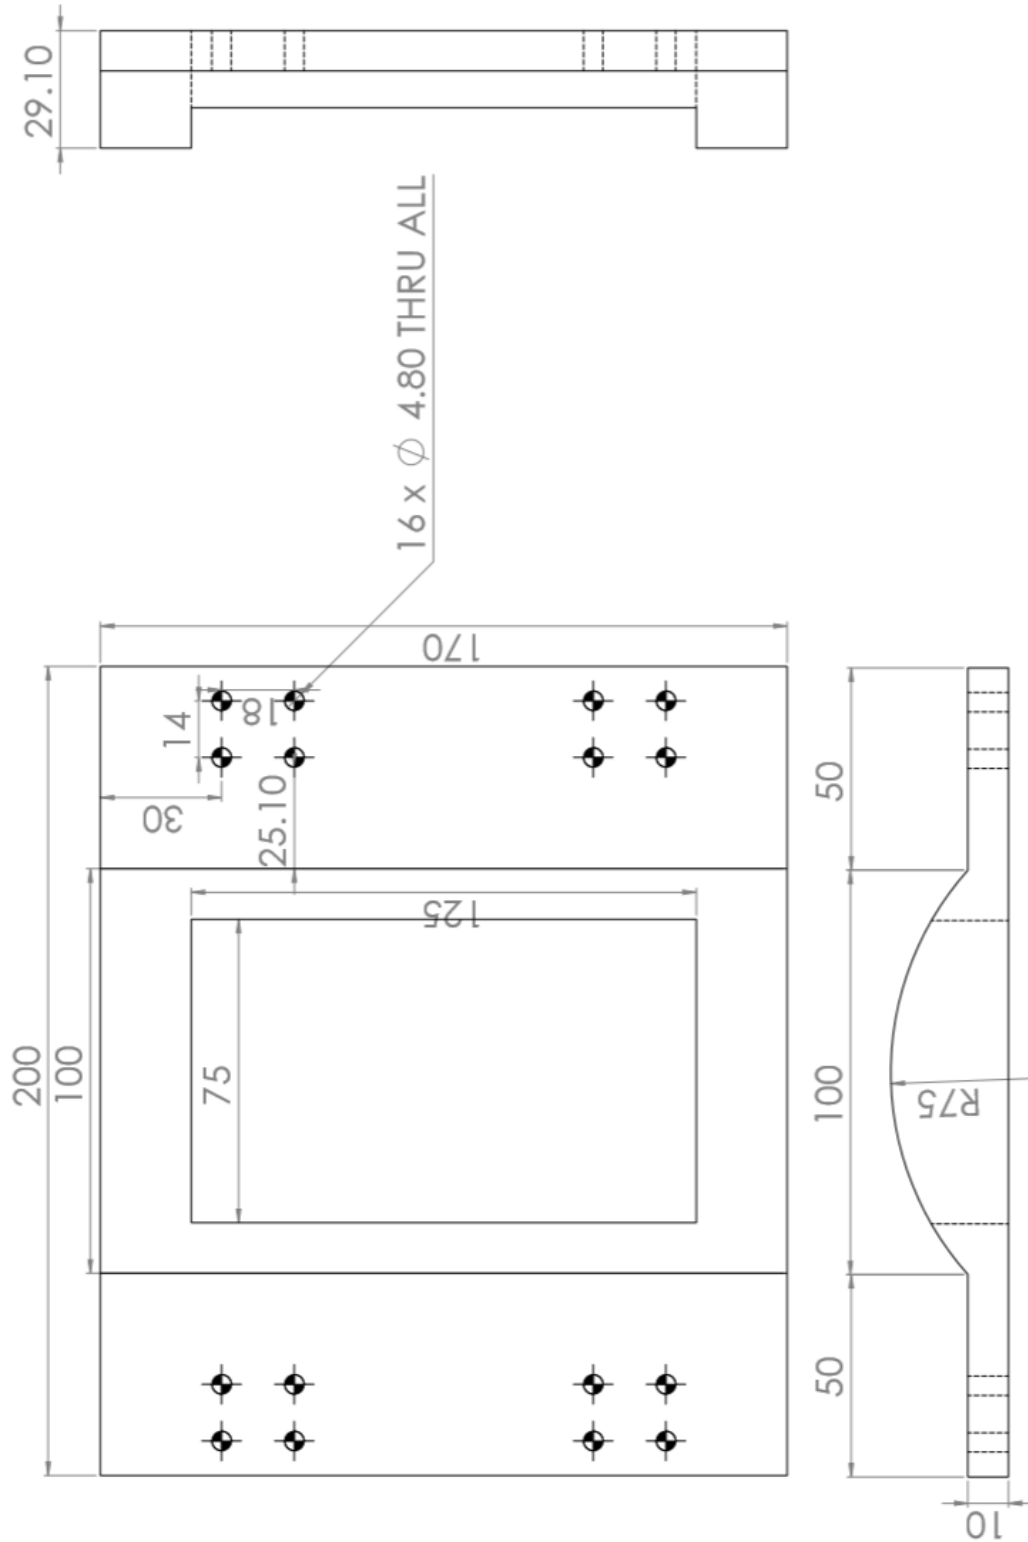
Mechanical Design of the Custom Fixture made on Solidworks
